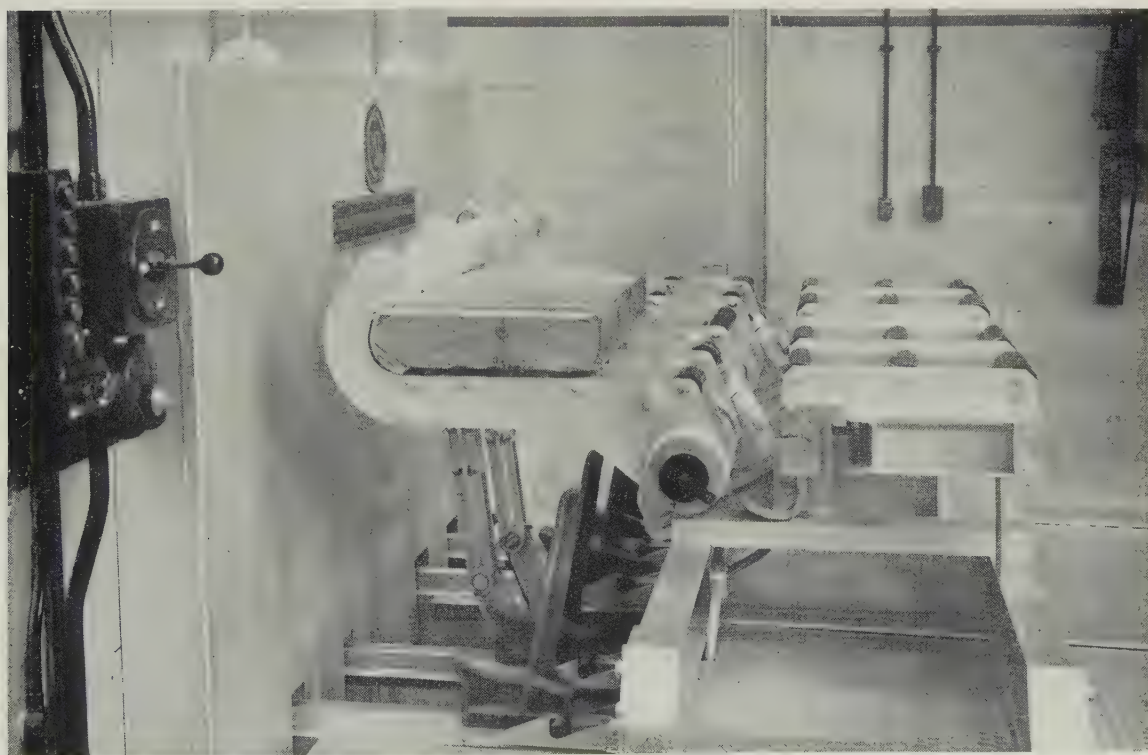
Discharge End of Billet-Heating Furnace, Showing Discharge Mechanism.
